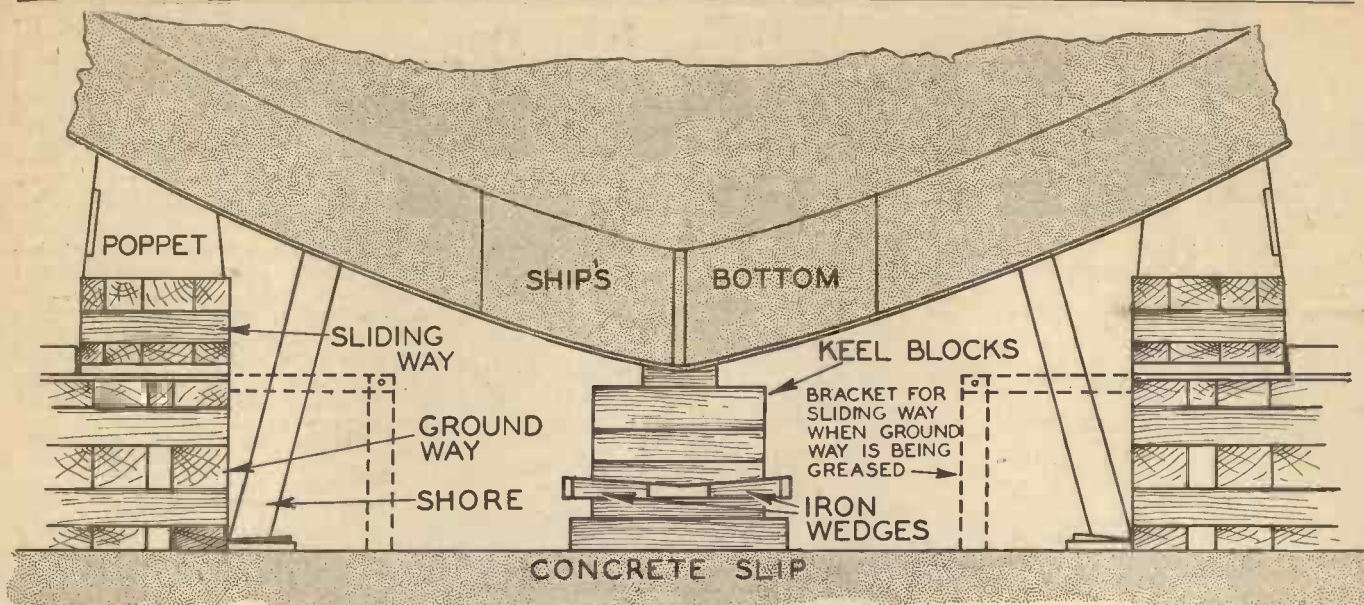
A cross-section of a ship on stocks showing keel blocks and poppets, etc., on one side.
